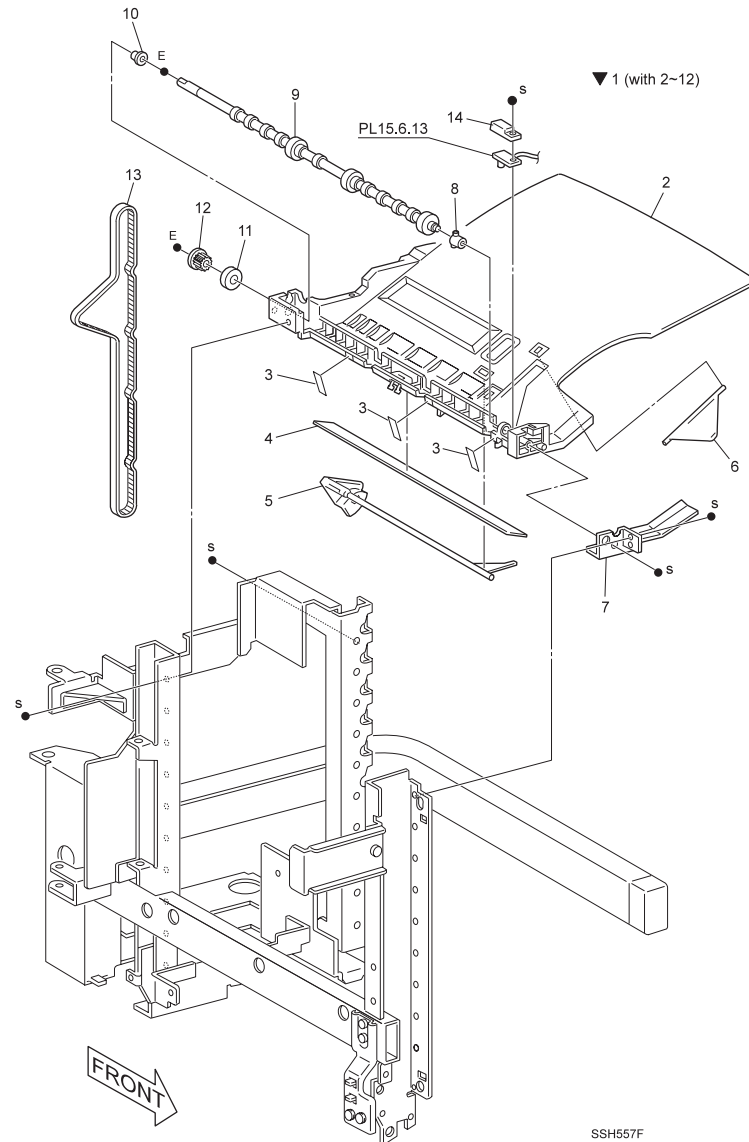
PL15.4 Bin Tray 1 Assembly
